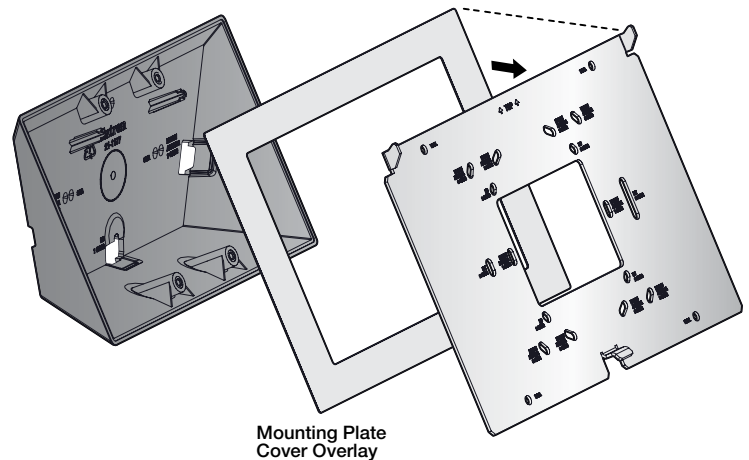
Attaching the Mounting Plate Cover Overlay to the Mounting Plate for TLP Pro 1035M
